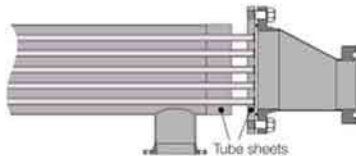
Double tube sheets prevents cross-contamination between the product and the heating/cooling media.
